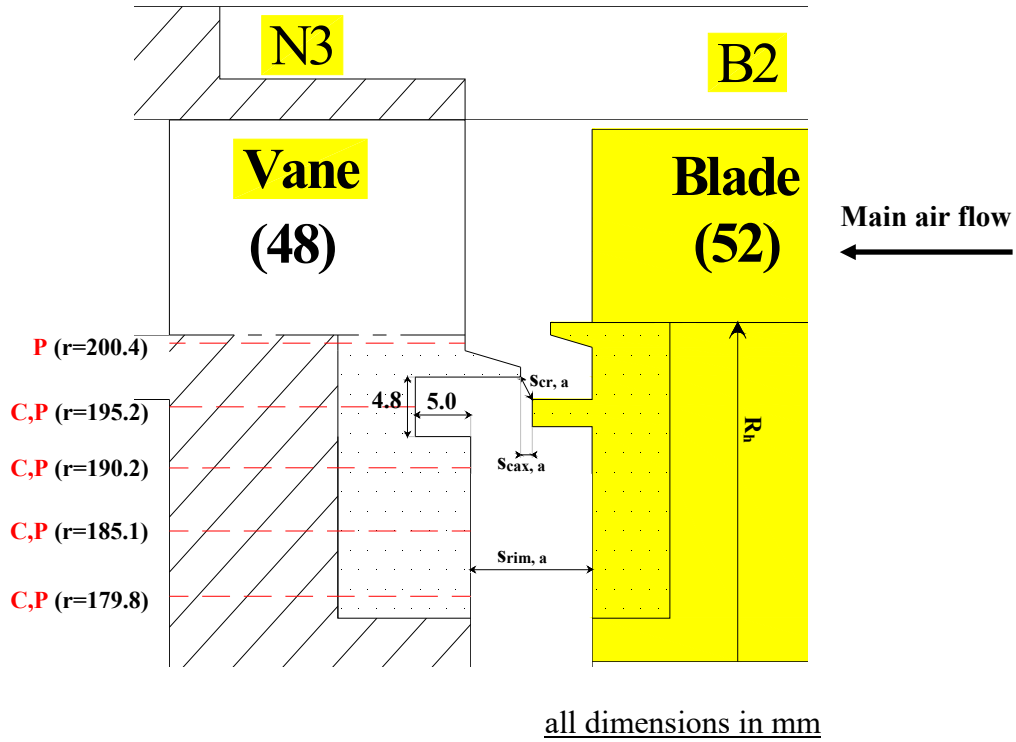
Aft Disk Cavity- Rim Seal Geometry
